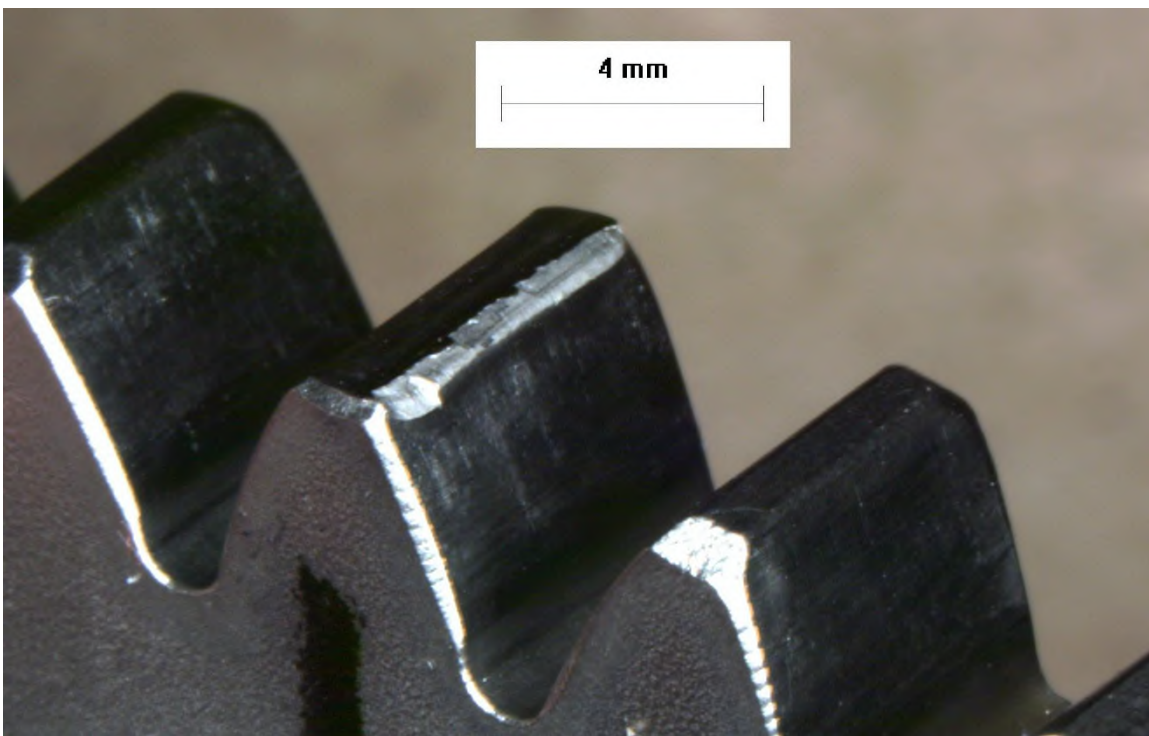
Example of damaged tooth tip after engagement of 1.96-mm- (0.077-in.-) diameter drill bit shank.
